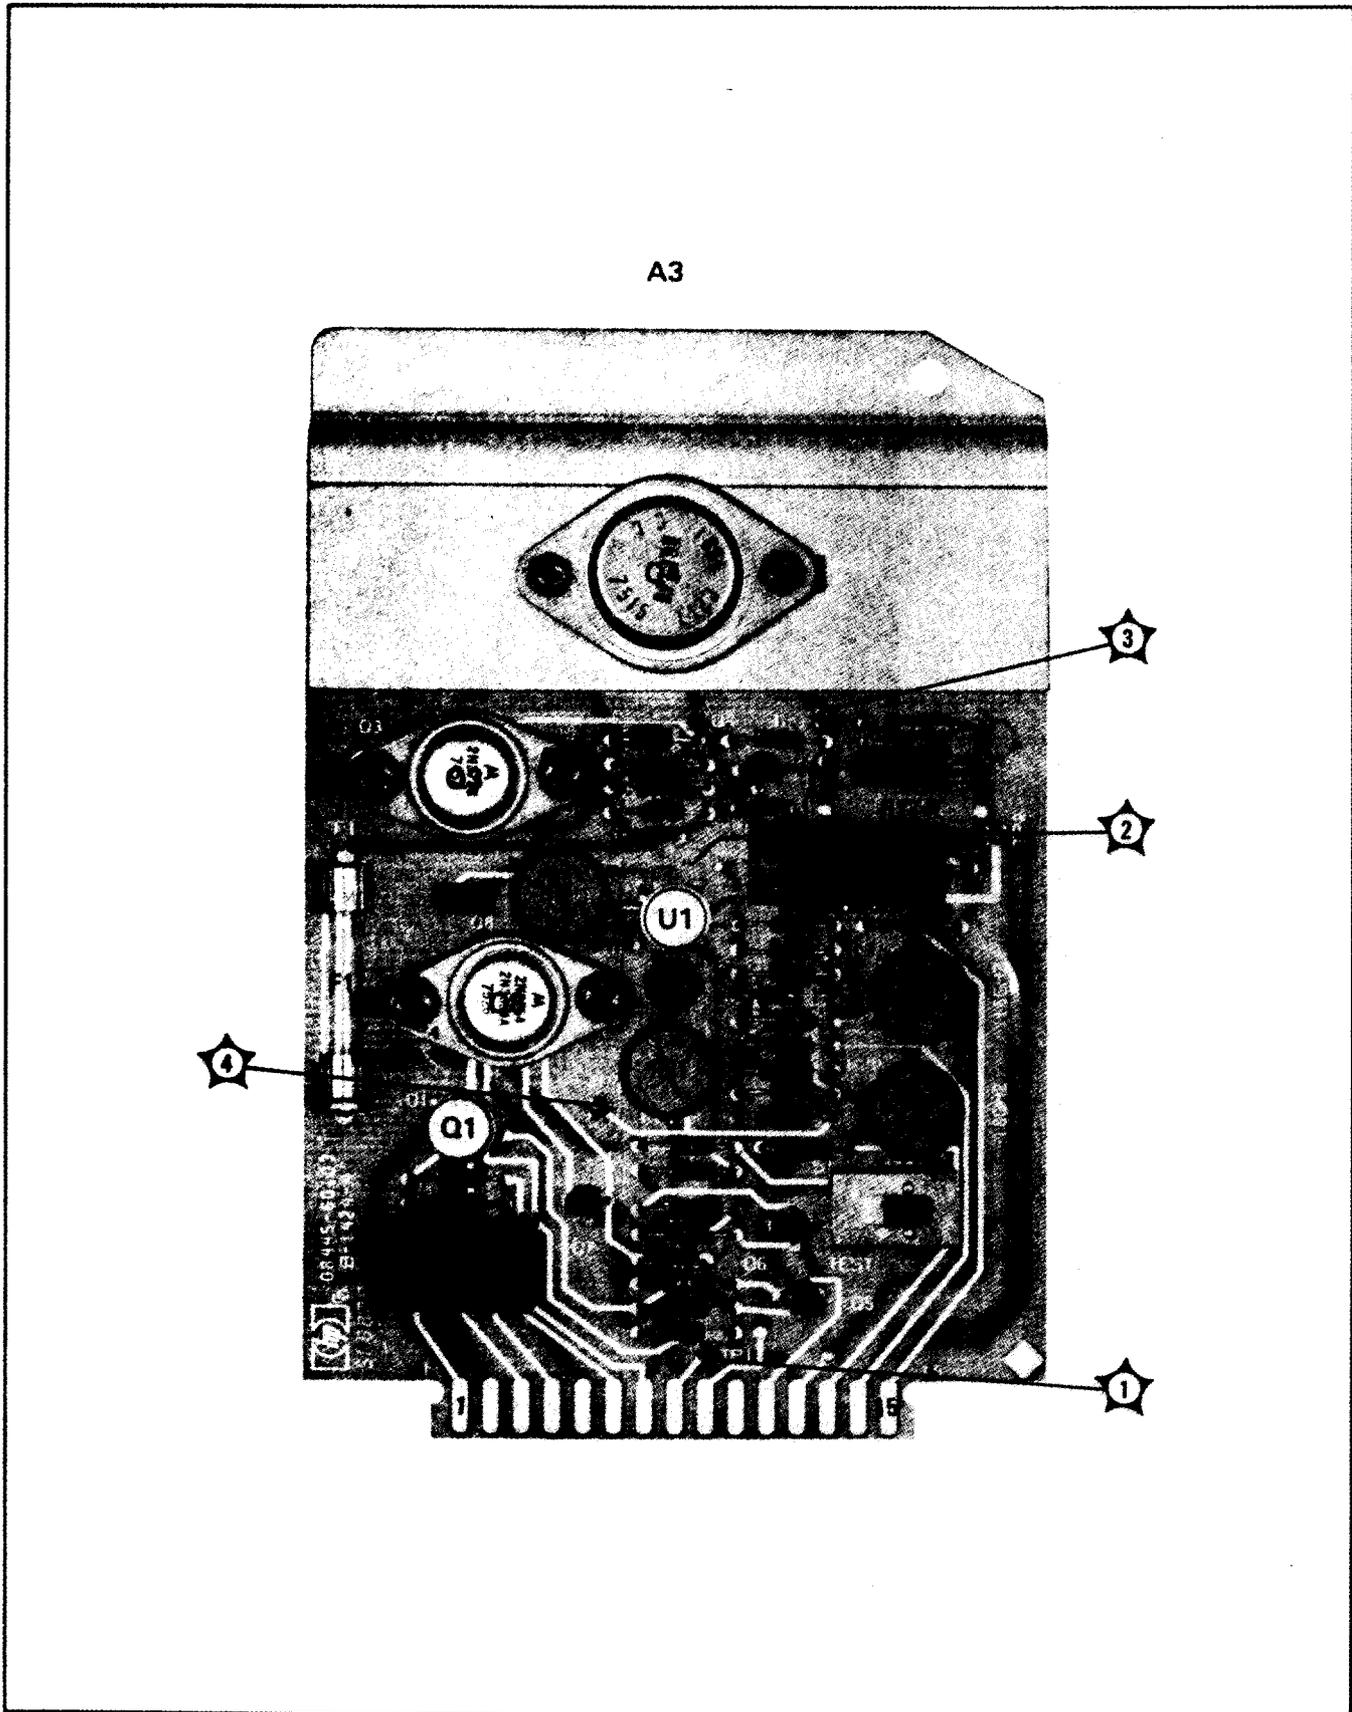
A. A3 YIG Driver Assembly (Change 1)
